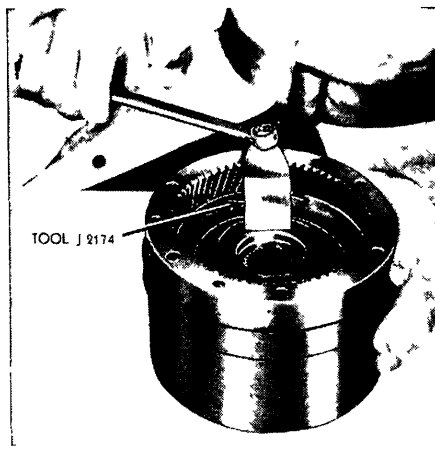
Install rear clutch hub holding tool to hold hub in place. Use a reverse drive flange attaching bolt to hold tool
